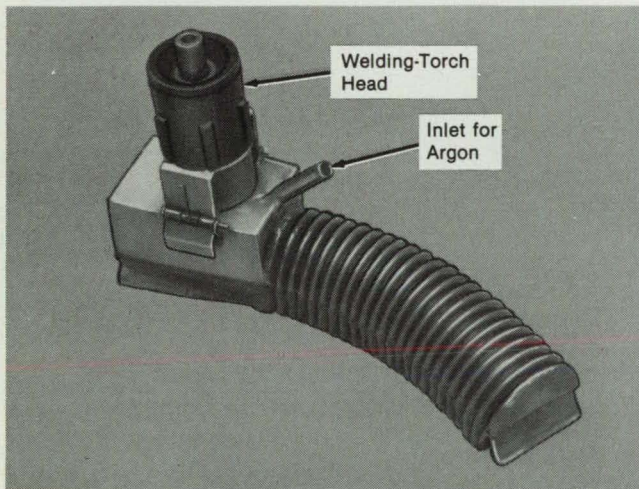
The Shield Can Be Bent or straightened to fit closely against the weld joint.
